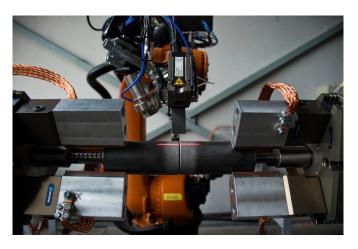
Cylindrical objects before their automatic weld-gap correction and during robotized welding in the workspace.
